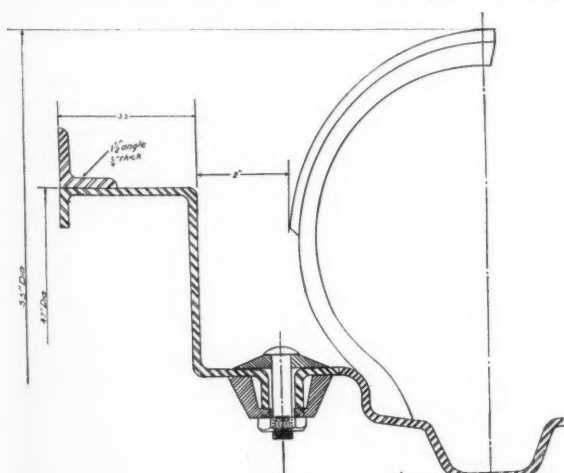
DETAIL DRAWING OF THE EXPERIMENTAL REAR-WHEEL GUIDE FLANGE
